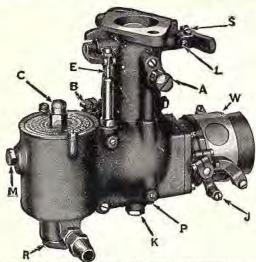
B. Stromberg type OX plain tube carburetor. A vertical, single control carburetor. This type differs from the OE principally in the arrangement of flange. The names of the parts are the same as in the OE (Fig. 25).
